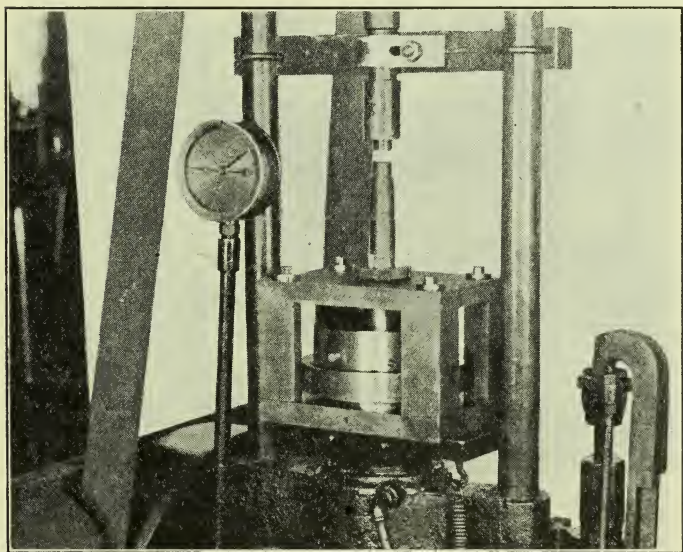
A SHAFT BEING PRESSED THROUGH THE DIE TO FORM THE SPLINES
